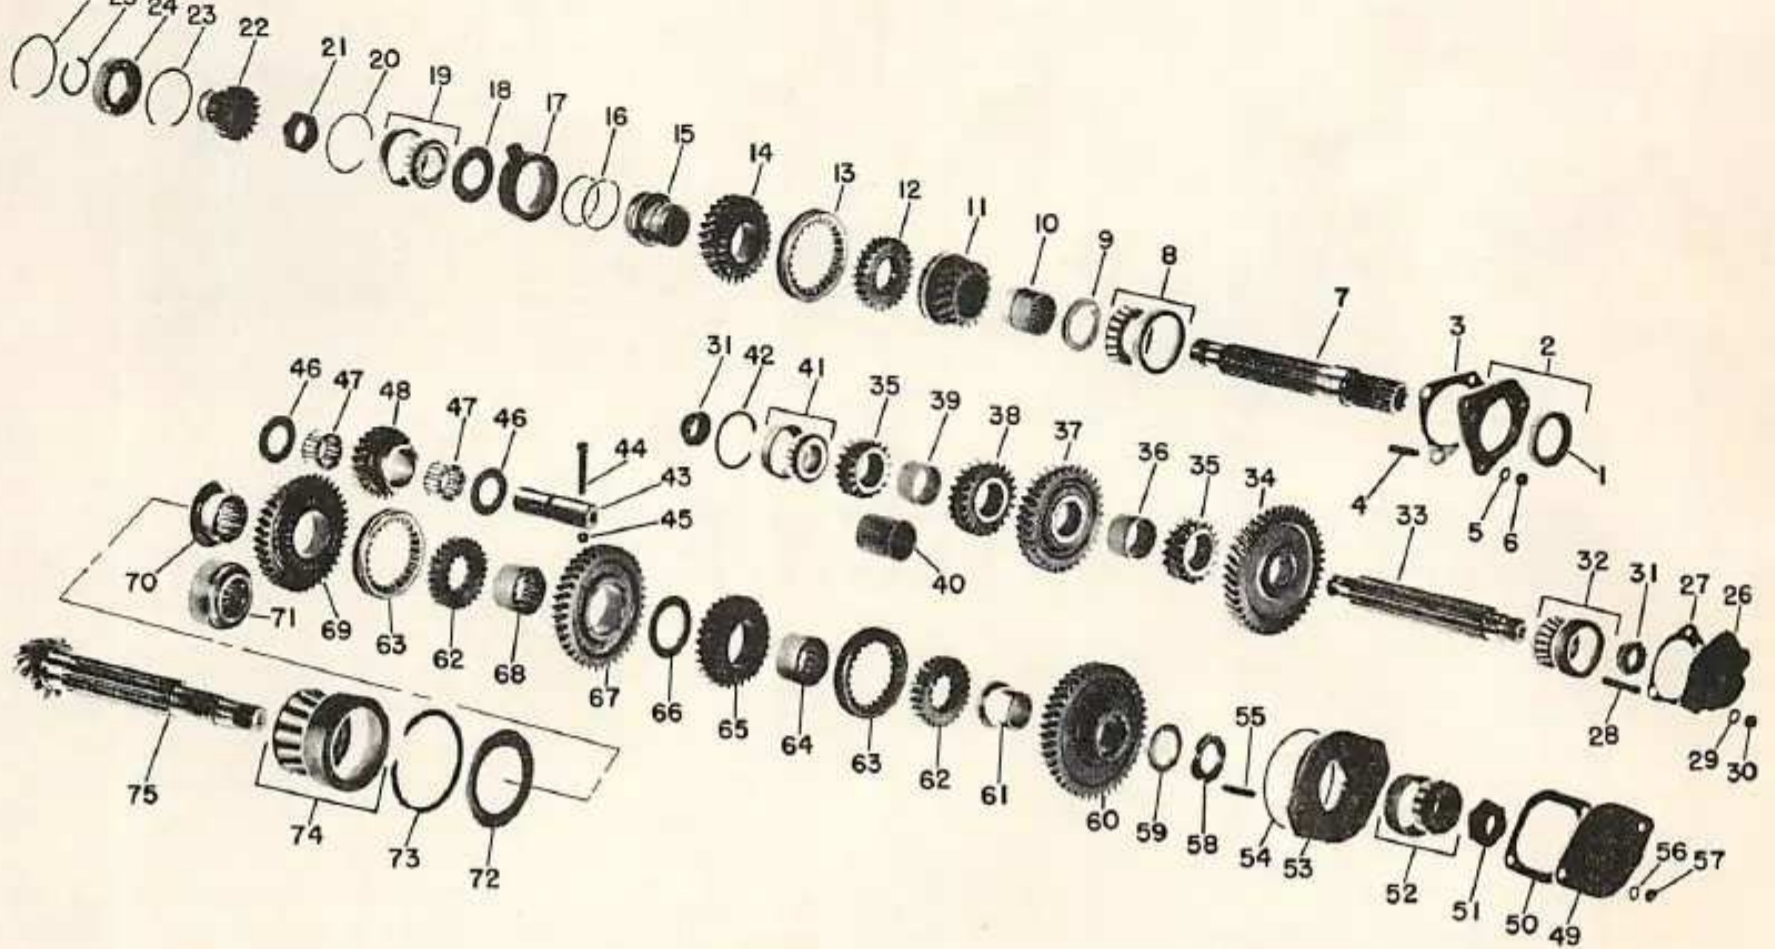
Exploded view of transmission gears and shafts. Reverse gears (35 rear, 48 and 69) are not used on models with Reverse-O-Torc Drive; spacers (40 and 71) instead of gears are used on output shaft and countershaft. Refer to Fig. O121 for parts used when four-wheel drive case is mounted on front end of main frame.
